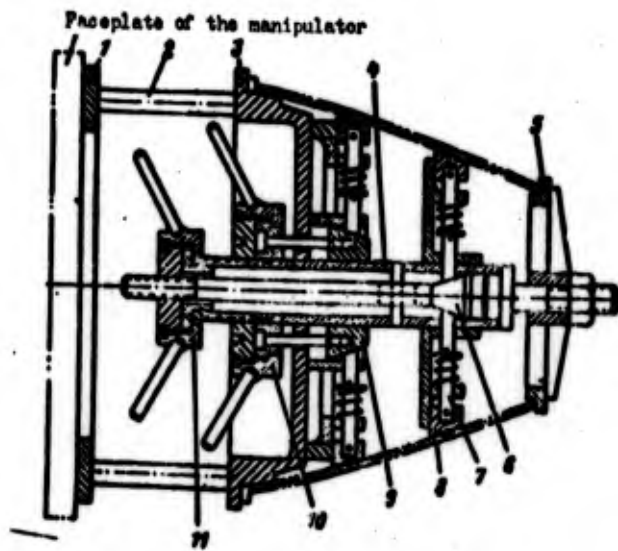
Device for the welding of parts of the KS: 1 - faceplate; 2 - stand; 3 - power ring; 4 - casing of the device; 5 - clamp; 6 - cone; 7 - pusher; 8 - jaw; 9 - cone; 10 - nut of cone 9; 11 - nut of cone 6.
